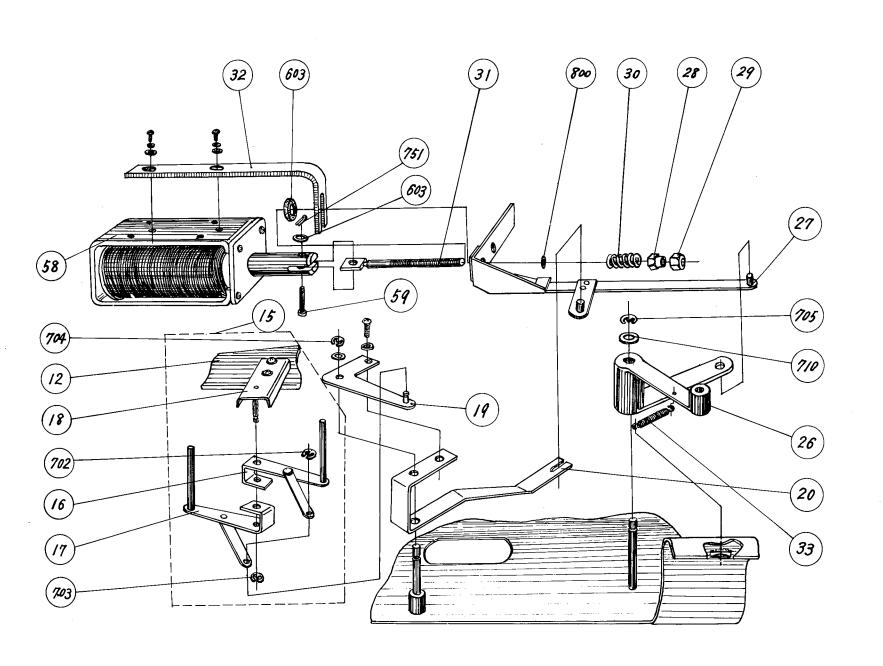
LIFTER/PINCH ROLLER ASS'Y, EXPLODED VIEW
